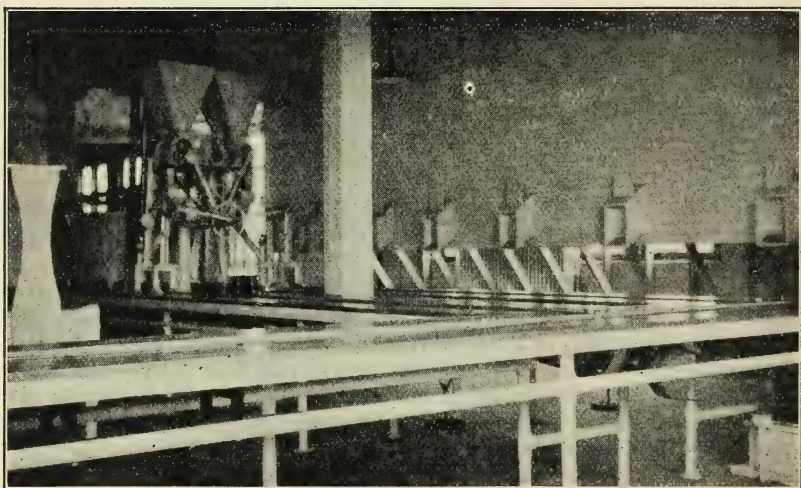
A packing room, with packing tables and conveyors, storage bins, and mixing and package, filling machinery
